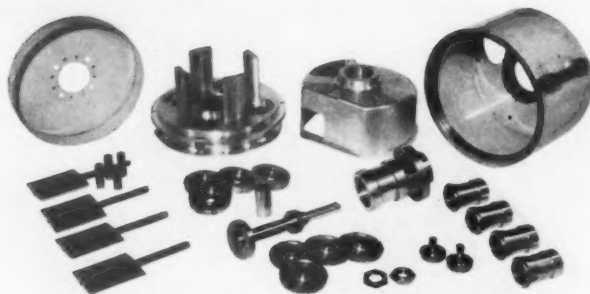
Machine dismantled showing component parts. (Mark I rotor with inward flow)
